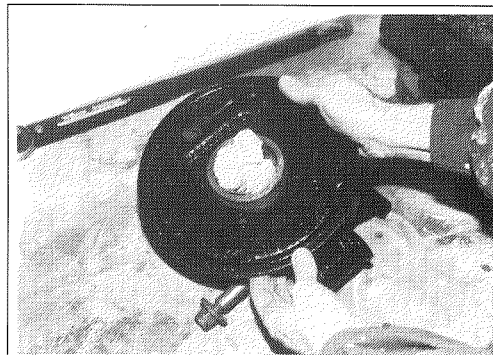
Moving away from the drive shaft for a while, drop the brake back plate over the vertical link...
